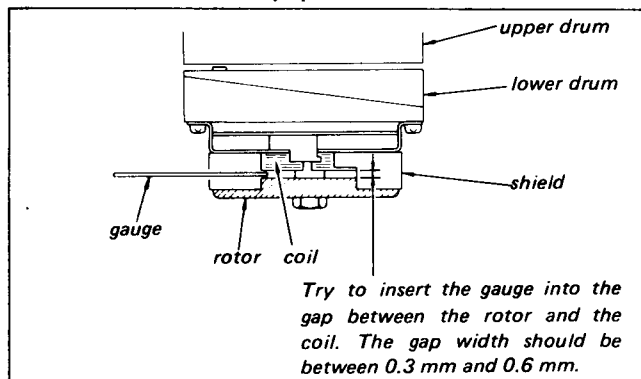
Checking the motor gap width after replacing the drum assembly
